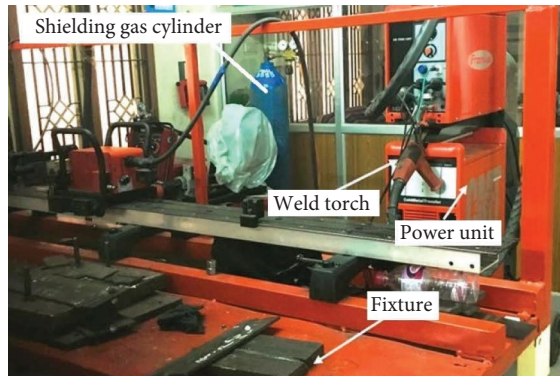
Photograph of CMT-welding machine setup.
